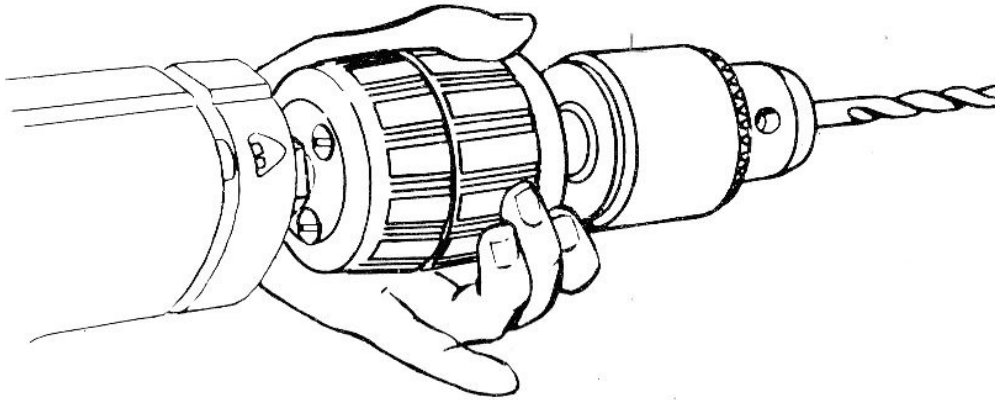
CHUCK ATTACHED TO OUTPUT SHAFT
